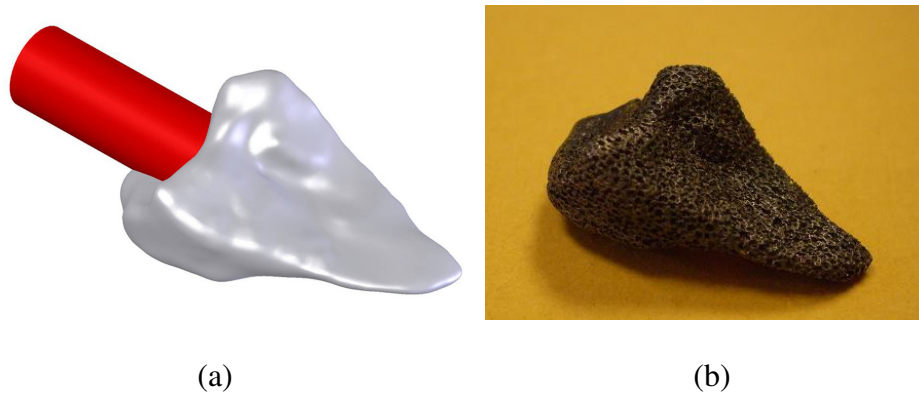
(a) CAD file with sacrificial support and (b) finished TM bone fracture fragment
